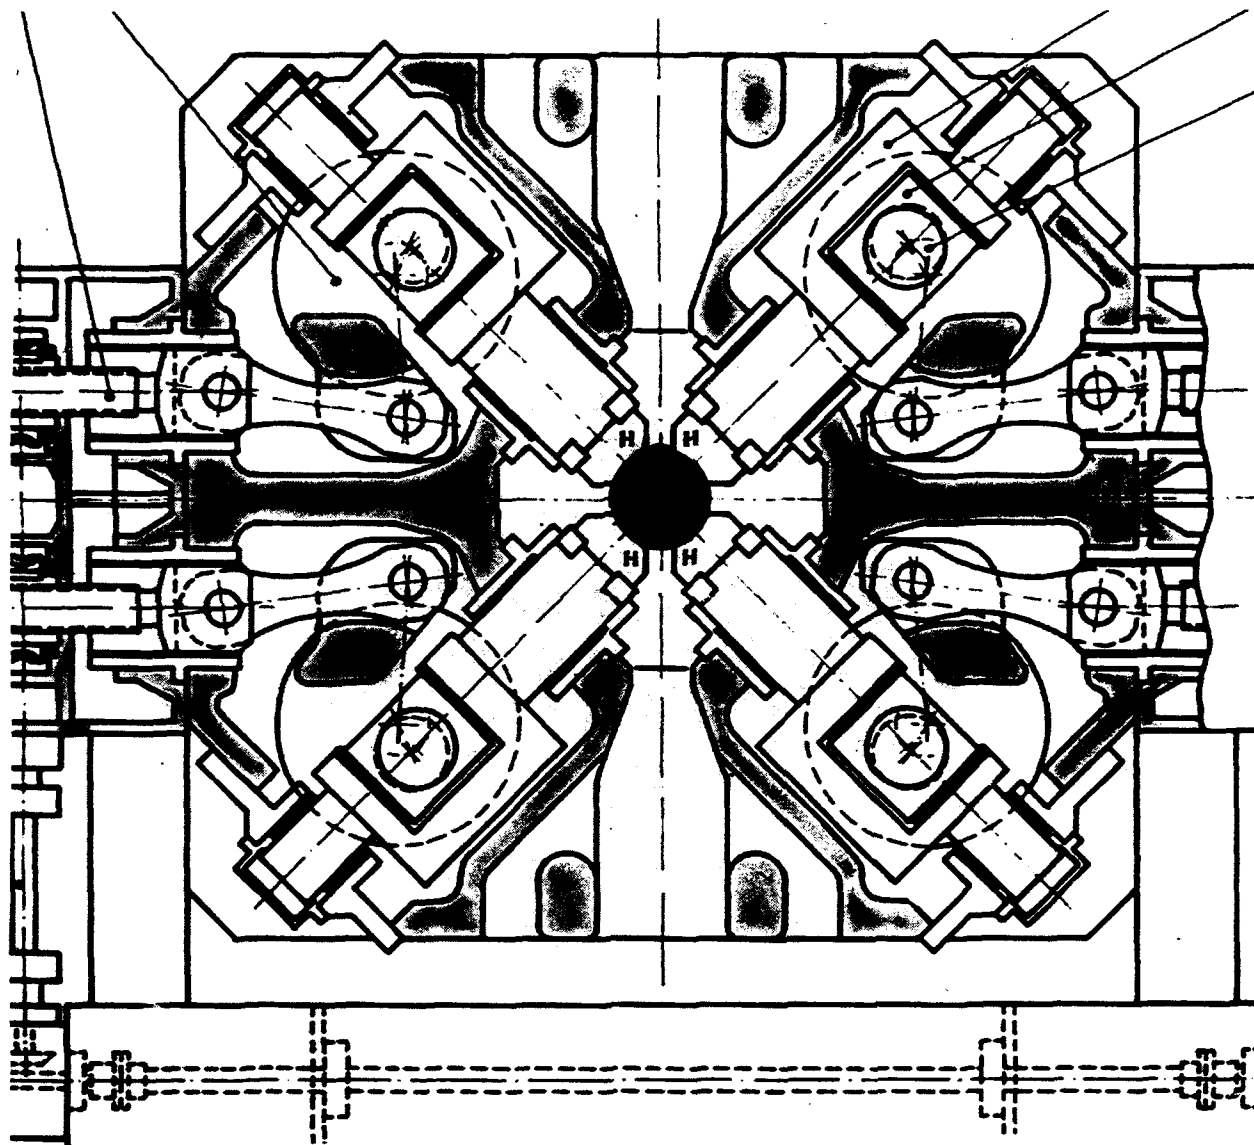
Schematic of forging box. The four hammers (H) are oriented 90 degrees apart in the assembly.
